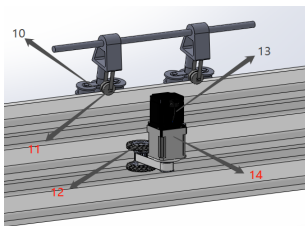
The components of transmission system, 10–Clamping wheel 11–Walking wheel 12–Driving wheel 13–Motor 14–Reducer.
